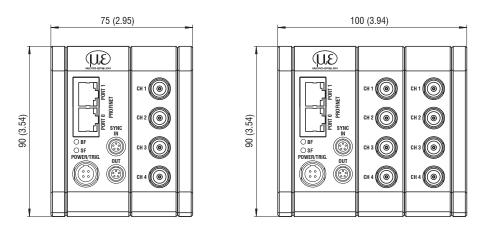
Dimensional drawing of controller with one or two demodulator modules Dimensions in mm.
